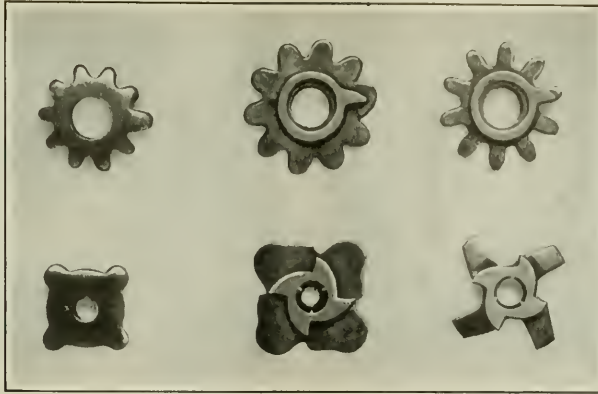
Successive Steps in blanking and cold-forging Two Instrument Parts
